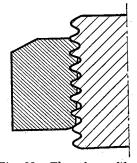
Thread profile in screw joints with nut having conically truncated thread
